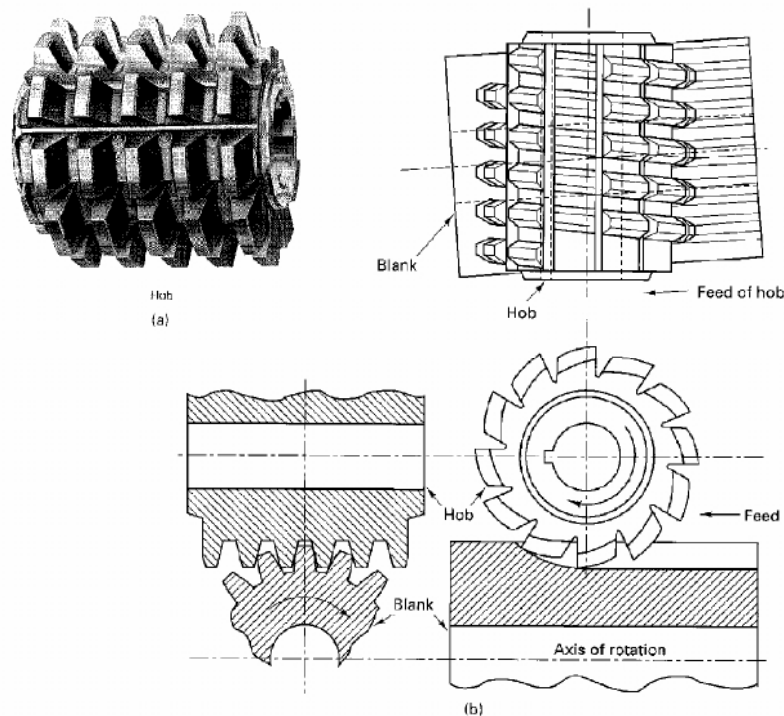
Hob and the relationship of the hob to the gear blank in machining a spur gear by hobbing
